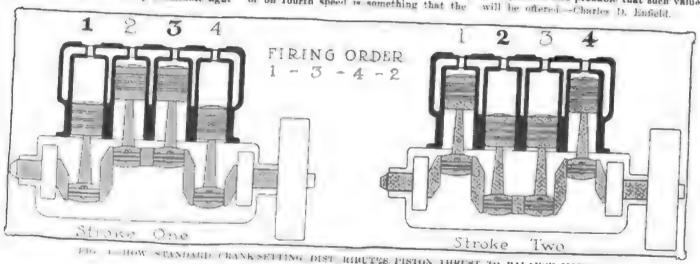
HOW STANDARD CRANK SETTING DIST RUBUTES, PISTON THRUST TO BALANCE MOTOR
